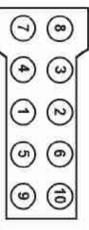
Sequence of the cylinder head fastening bolts tightening
